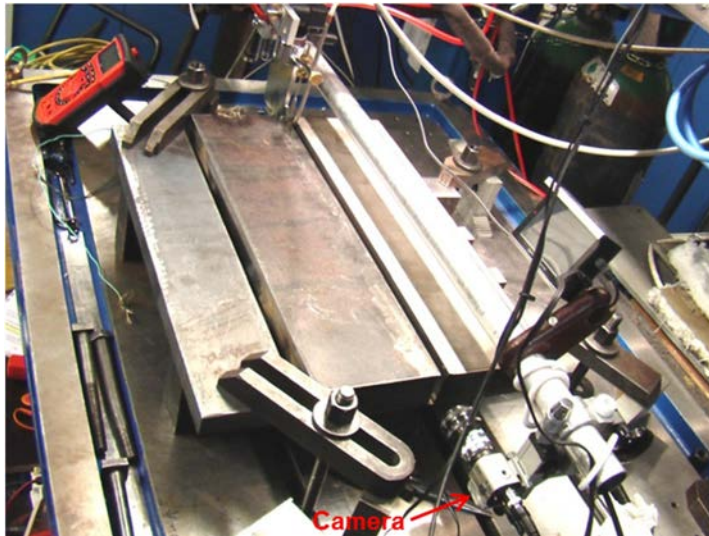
Pre-mock-up of S 355 carbon steel and AISI 304 stainless steel before welding.
